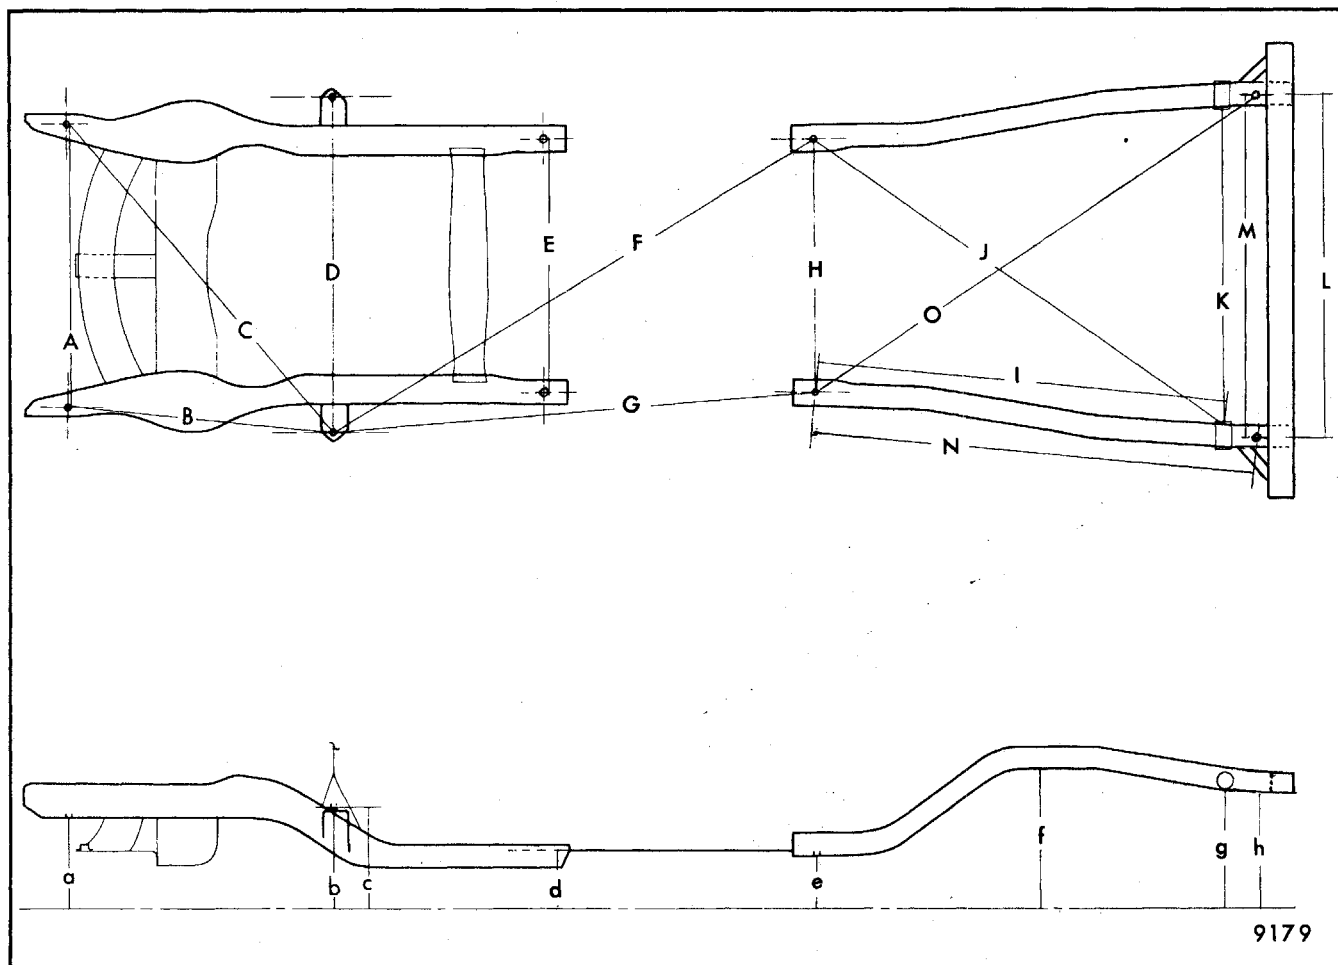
Horizontal and Vertical Checking Dimensions - "X" Bodies
